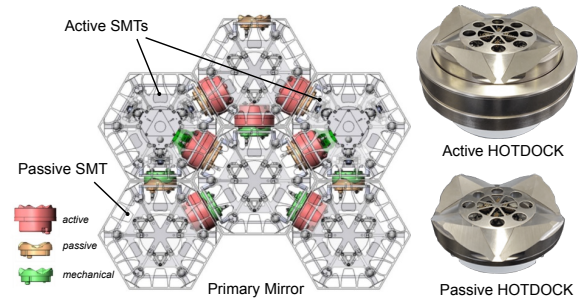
Primary mirror in the dPAMT demonstrator. Left: components of the assembly. Right: HOTDOCK standard interconnect, passive and active version.
